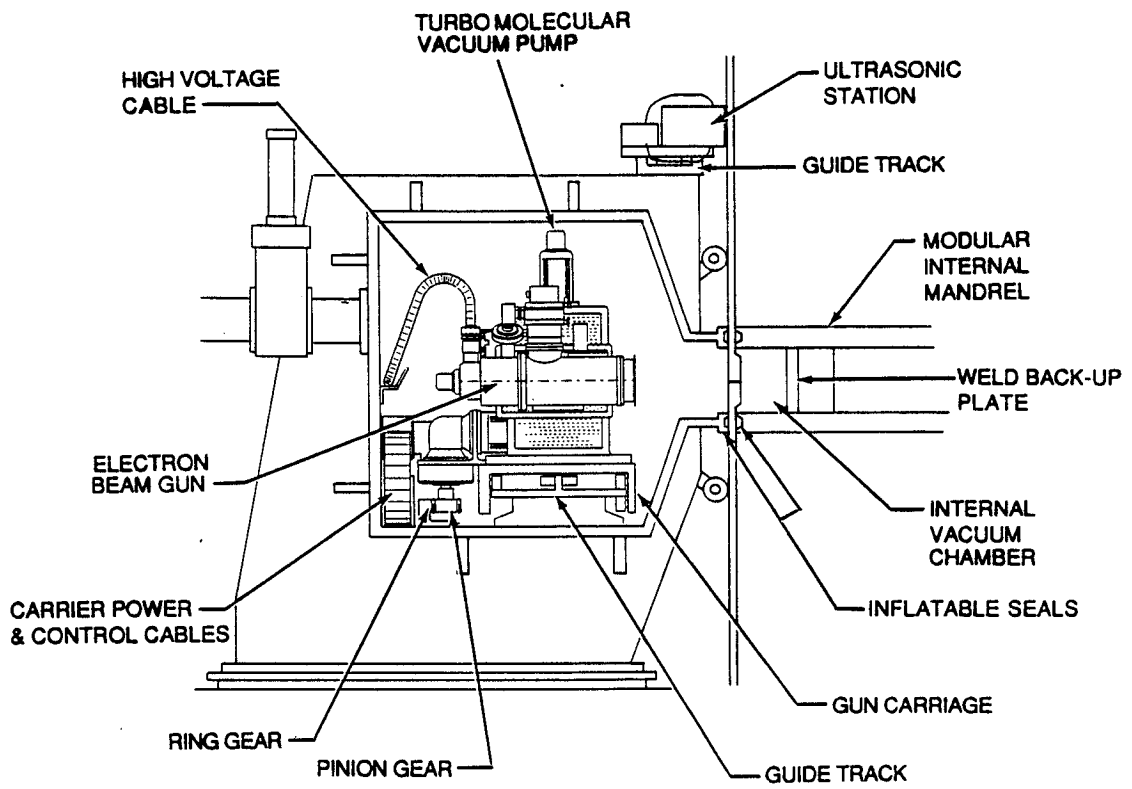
Electron Beam Welding Cell Detail
